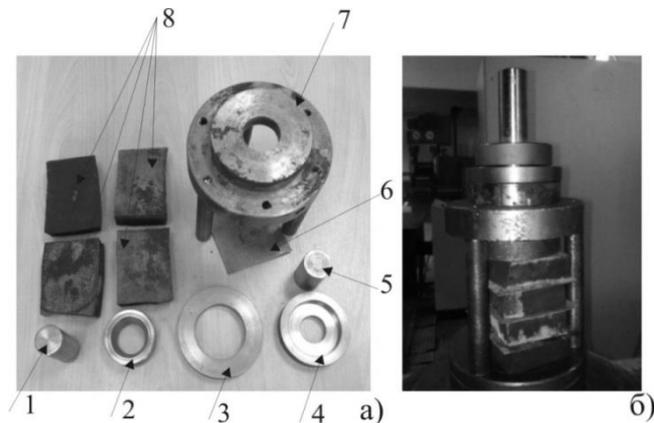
Tooling for drawing and drawing with forced flanging: 1 - punch, 2 - matrix, 3 - bandage, 4 - adjusting ring, 5 - ejector, 6 - gasket, 7 - container, 8 - elastic buffer, a – equipment parts for drawing, b - general view.
